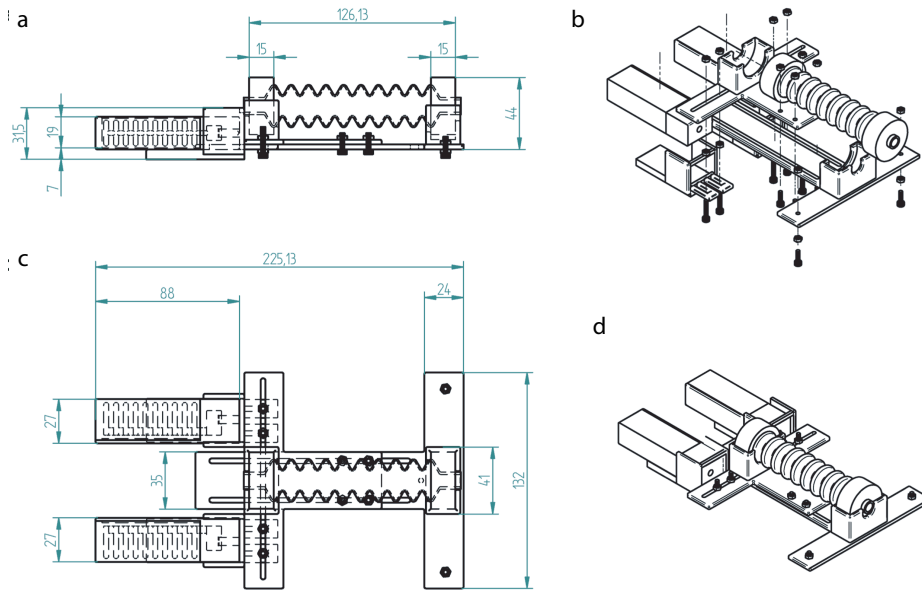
Schematics of the assembly we use in Figure 2.4b, Figure 2.5, and Figure 2.7. We fabricate a 3D-printed PLA frame to accommodate the soft linear actuator and the two bending actuators. We assemble the individual parts together using M2 screws. To reduce friction with the ground, we also use the M4 screw heads as contact points to the surface on which the assembly sits. (a)-(c) Geometry and dimensions of the assembly. (b)-(d) Assembly with highlighted screw positions and completed assembly. For the demonstrators in Figure 2.4b, Figure 2.5, we do not include in the assembly the two supports for the Pneunet actuators.
